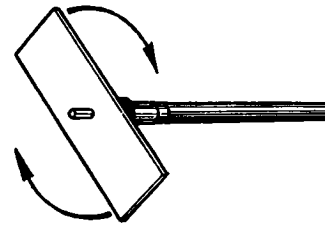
Cardboard pointer on inner flex for checking the number of turns.
